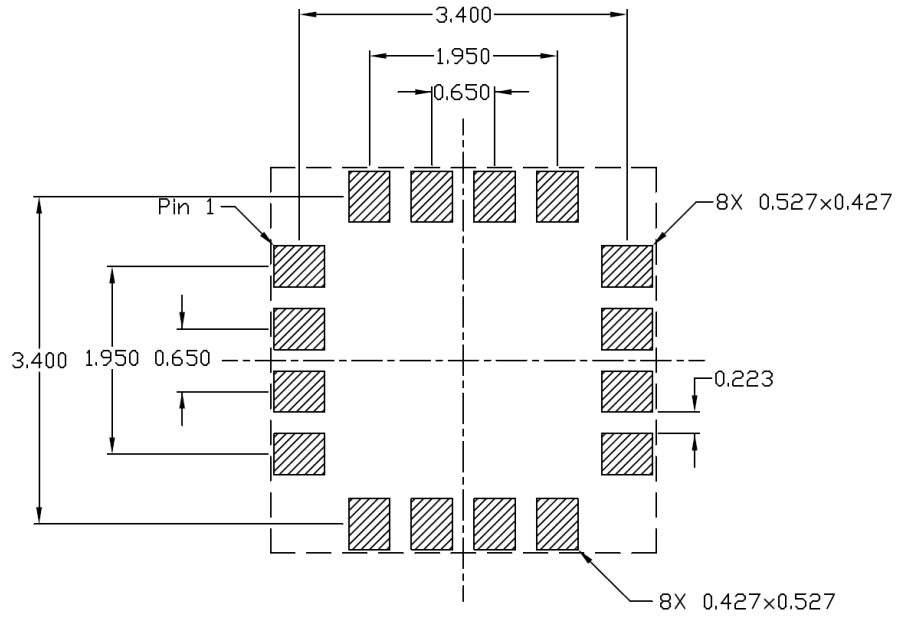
Example of solder mask for the 4 x 4 mm LGA package (Top view)
